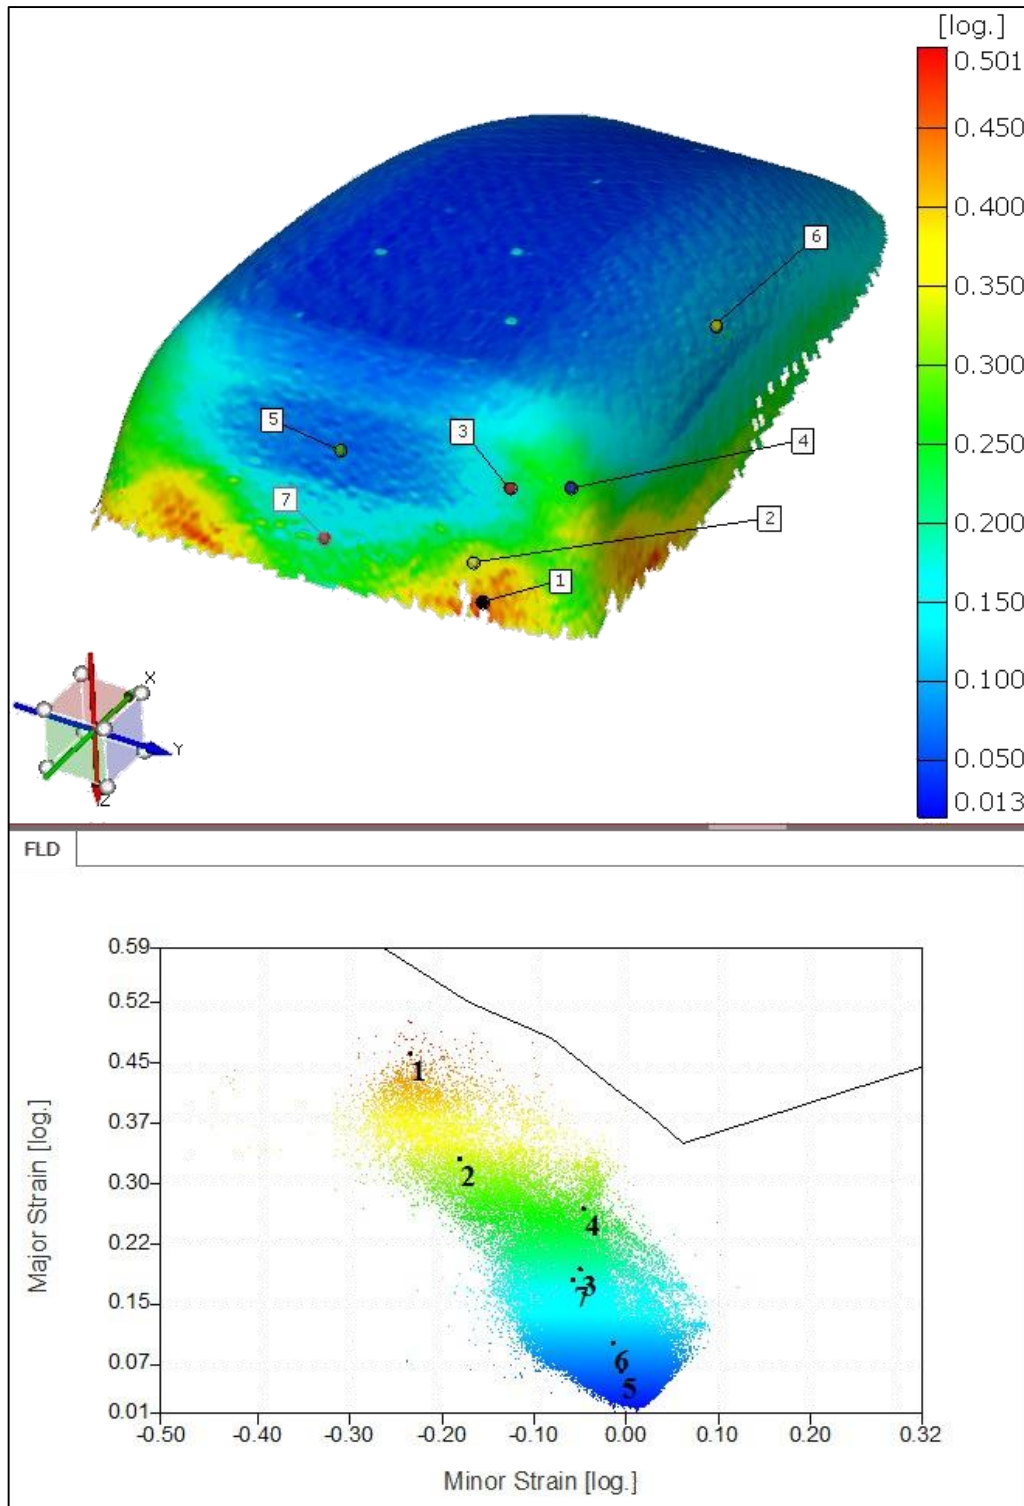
The real car component manufactured by deep drawing process and the optical measurement results in strain space.
